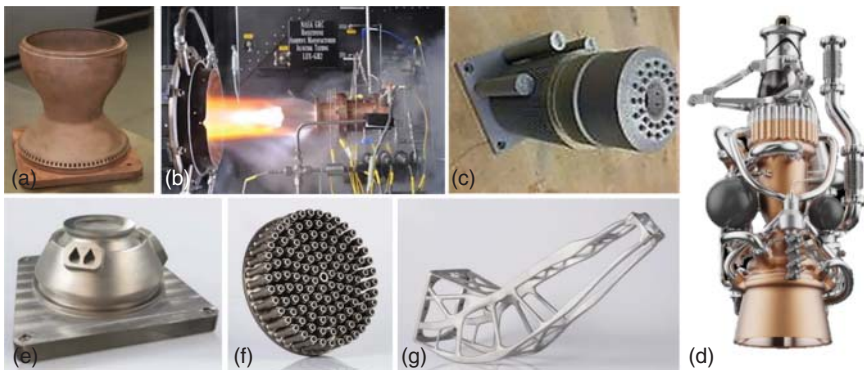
Typical LPBF-printed components for the aerospace sector. (a) Copper rocket nozzle, (b) testing a printed rocket nozzle, and (c) rocket injector printed using an Inconel steel powder. Source: Reproduced with permission from NASA. (d) Combustion chamber assembled with printed copper components and conventionally manufactured components. Source: Reproduced with permission from Launcher. (e) Injector head of the all-in-one design of a rocket engine with 122 injection elements using EOS Nickel Alloy IN718 and (f) Ariane 6 baseplate for function integration. Source: Reproduced with permission from ArianeGroup. (g) Al-Si10-Mg satellite bracket. Source: Reproduced with permission from RUAG Group.
